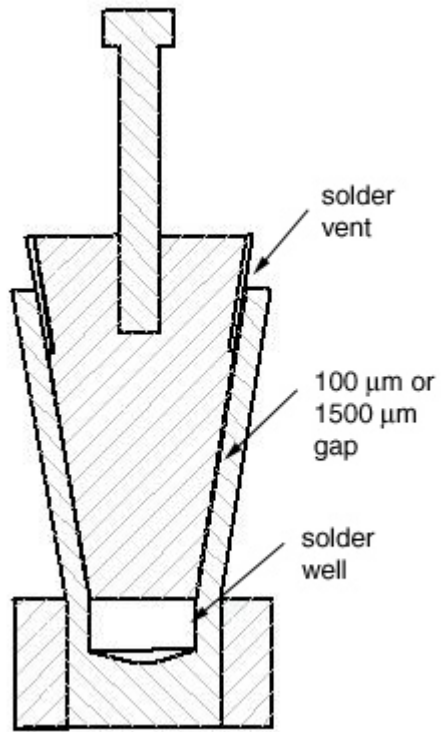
Conical casting mold used for both bulk and thin cast samples.
